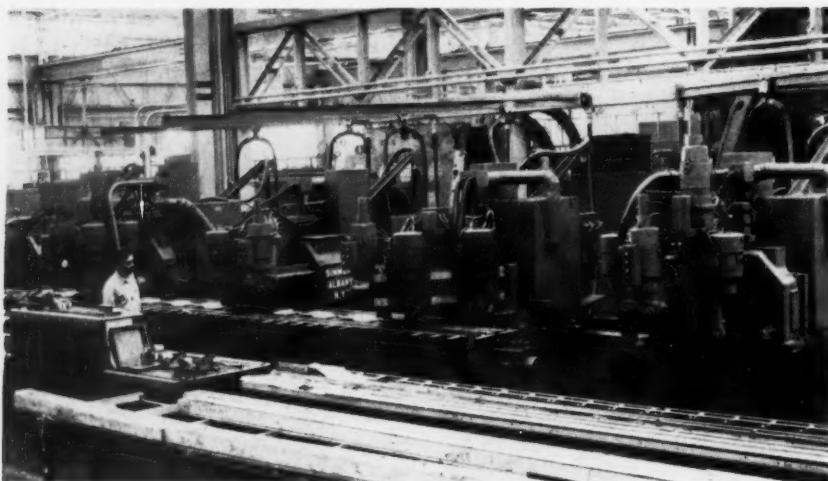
Bank of cutting heads performs 250 operations on copper generator conductor bars.
